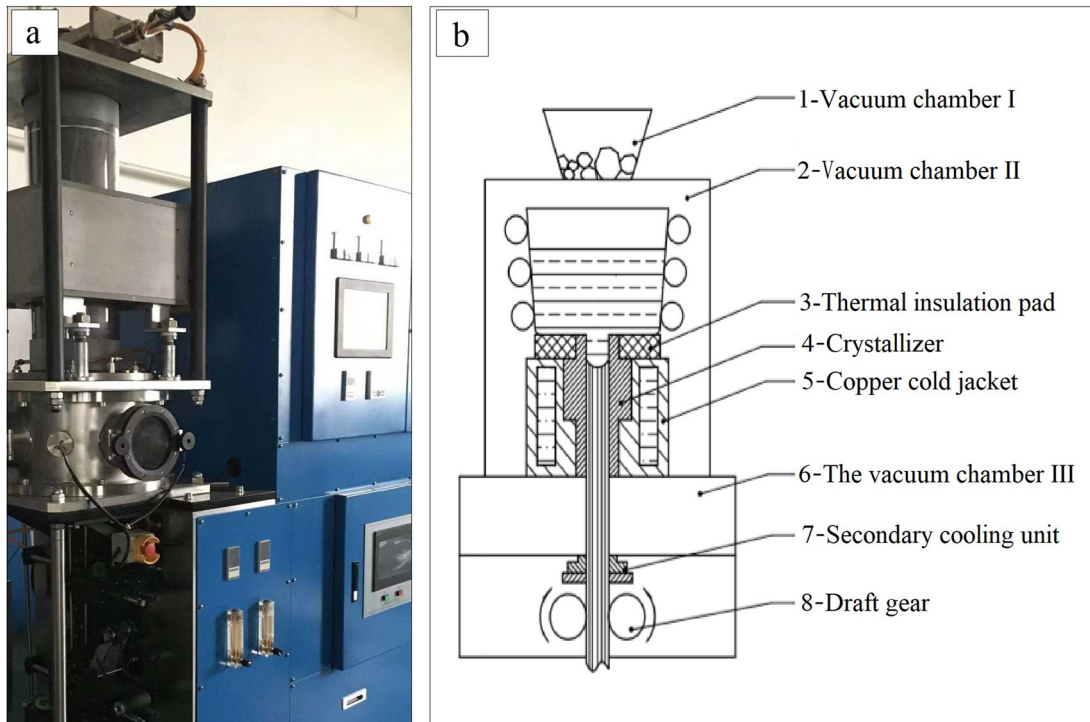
Three-chamber vacuum cold mold vertical drawing continuous casting device (a) and its schematic diagram (b).
